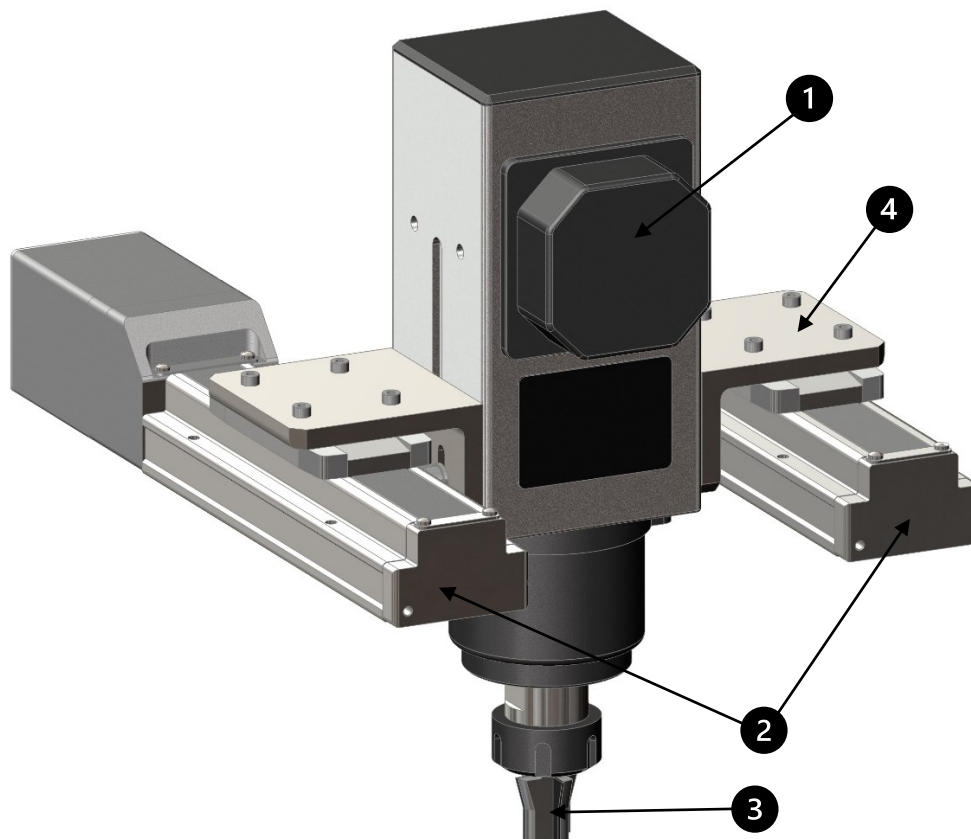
Calibration and tapering unit. (1) Tool spindle drive. (2) Ball screw slider with step motor and additional support rail. (3) Milling tool. (4) Mounting brackets.
